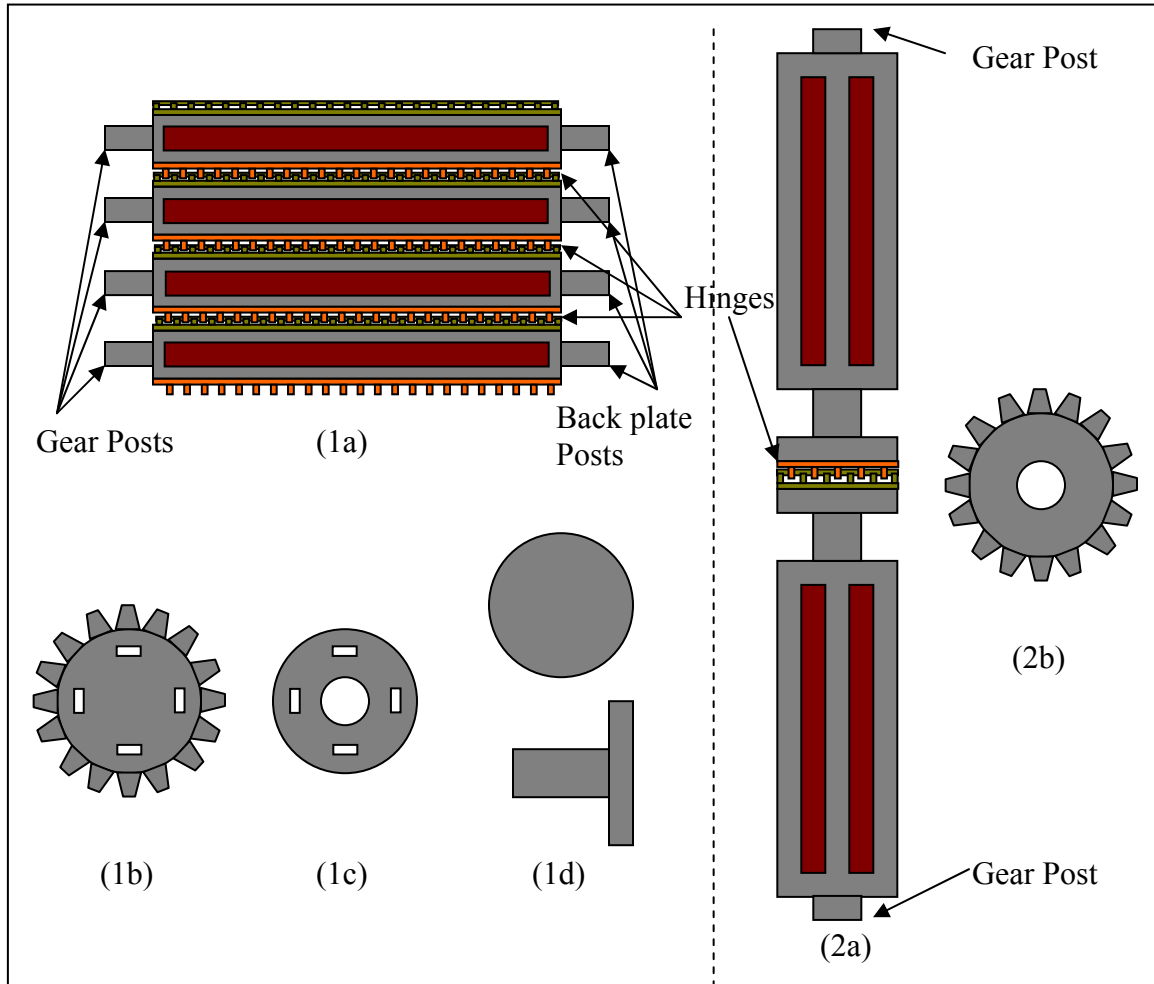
Hinged designs for the stator shaft (a) with stator gears (b) and back plate components (c and d).
